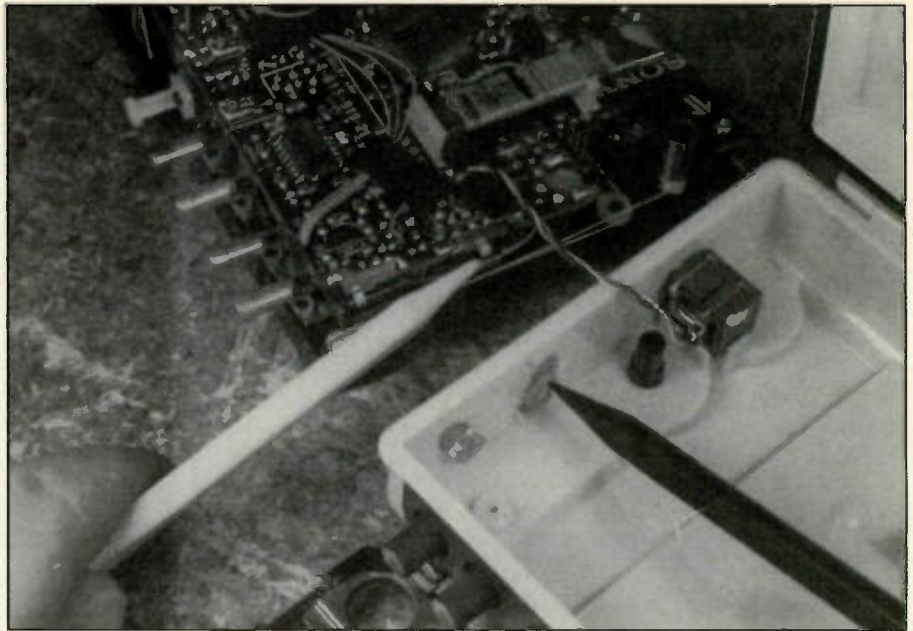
This knob and switch must be lined up on reassembly. Note that headphone jack (in the case with wires attached) is not part of the circuit board on this model.
